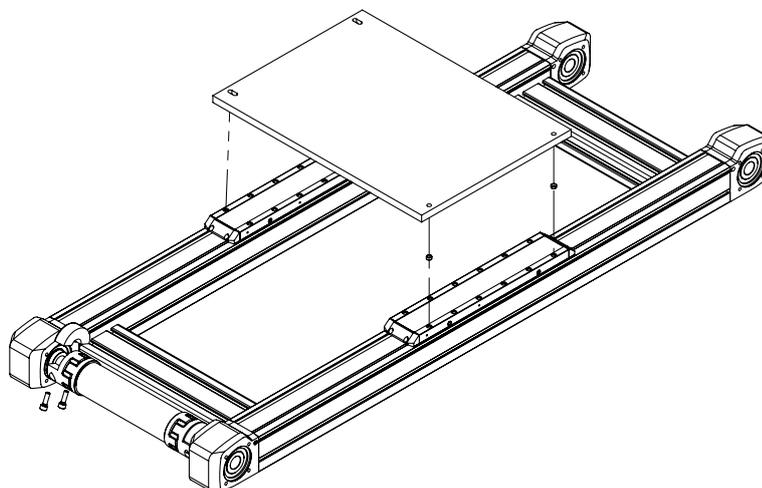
Mounting the adapter plate above both double axis carriages
